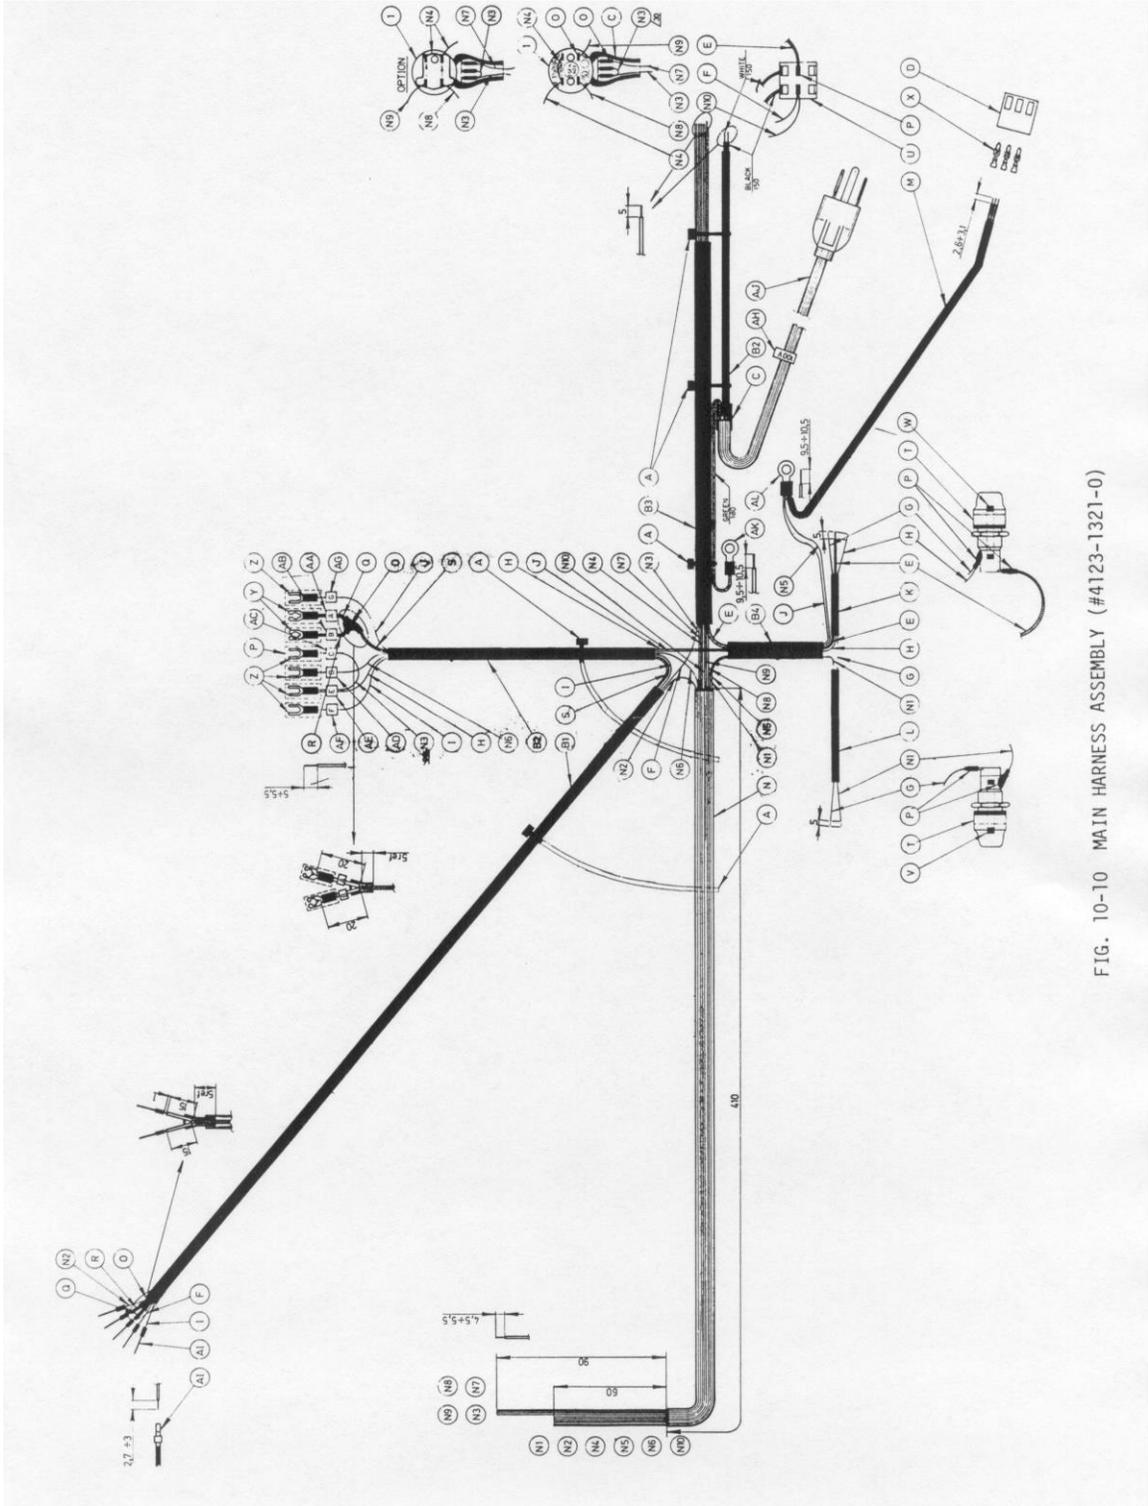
MAIN HARNESS ASSEMBLY (#4123-1321-0)
